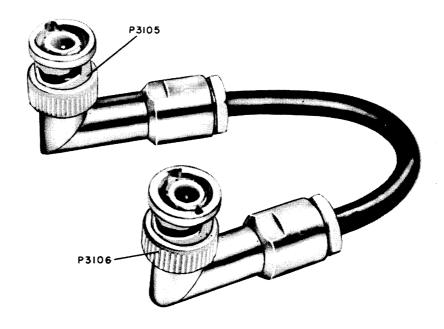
R-F Oscillator O-243/FRT-24, Coaxial Jumper Cable
